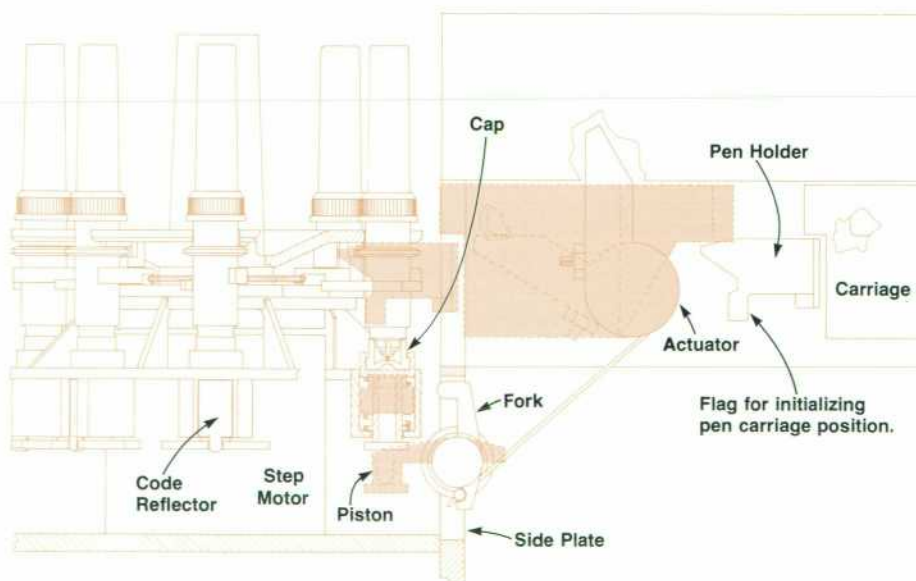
Pen exchange and capping mechanism. The shaded dashed outline areas indicate the position of the actuator, fork, pen holder, carousel, piston and cap when a pen is being picked from or deposited into the carousel.
